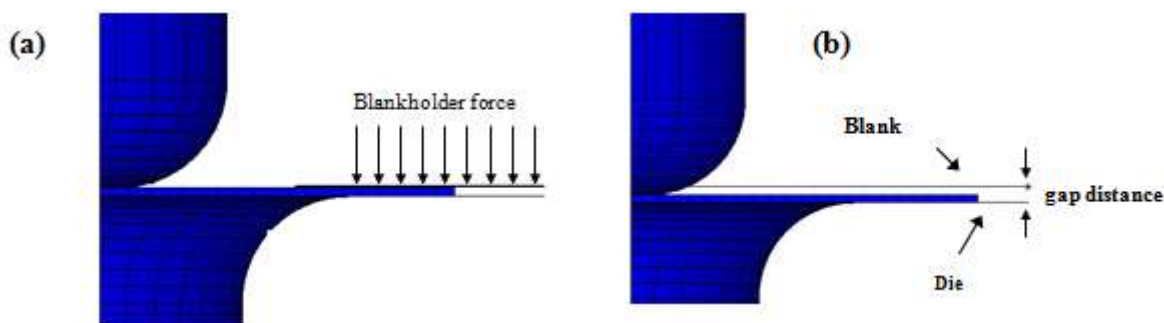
Mechanism of blank holder (a) blankholder force (b) blankholder gap
